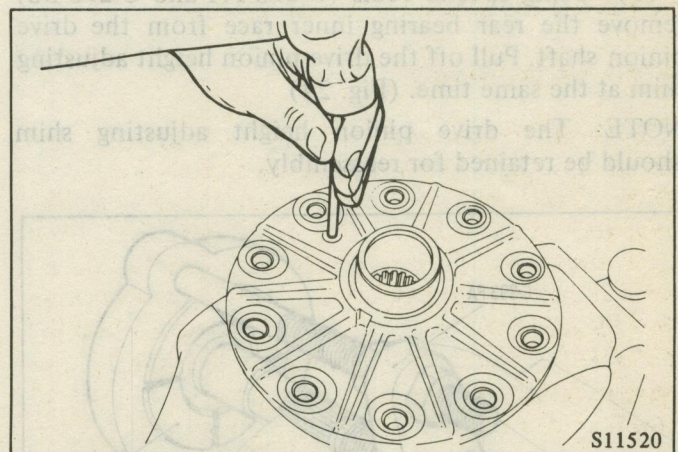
Driving Out the Pinion Shaft Lock Pin
